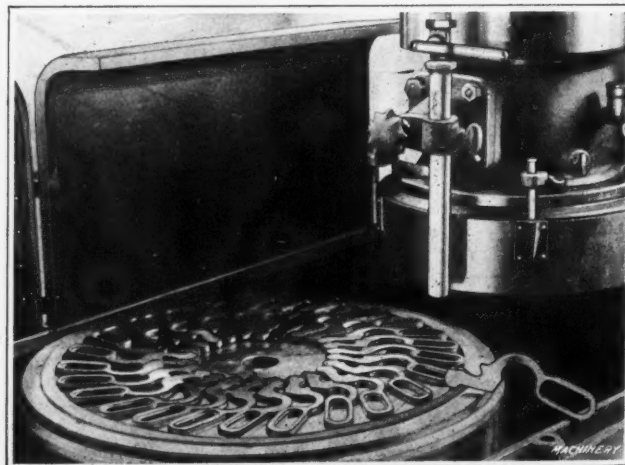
Method of holding and grinding Lever for Repeating Rifles shown in Fig. 20, on a Blanchard Vertical Surface Grinder
